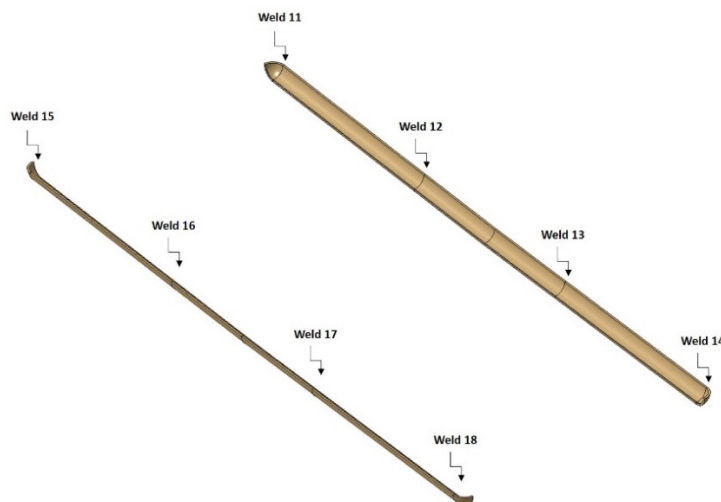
Welding of main shell plate assembly – Approach – 1
